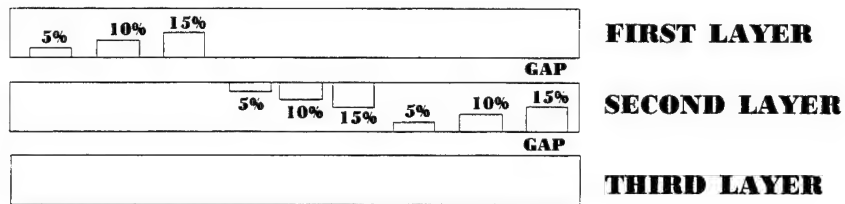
TYPICAL CALIBRATION SPECIMEN
